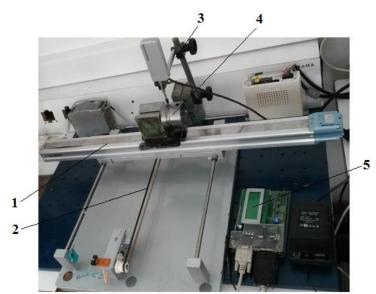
The 3-D CNC dimensional inspection system: 1 – the first axis; 2 – the second axis; 3 – the measuring system; 4 – the tested probe; 5 – the hardware device corresponding to the measuring system
